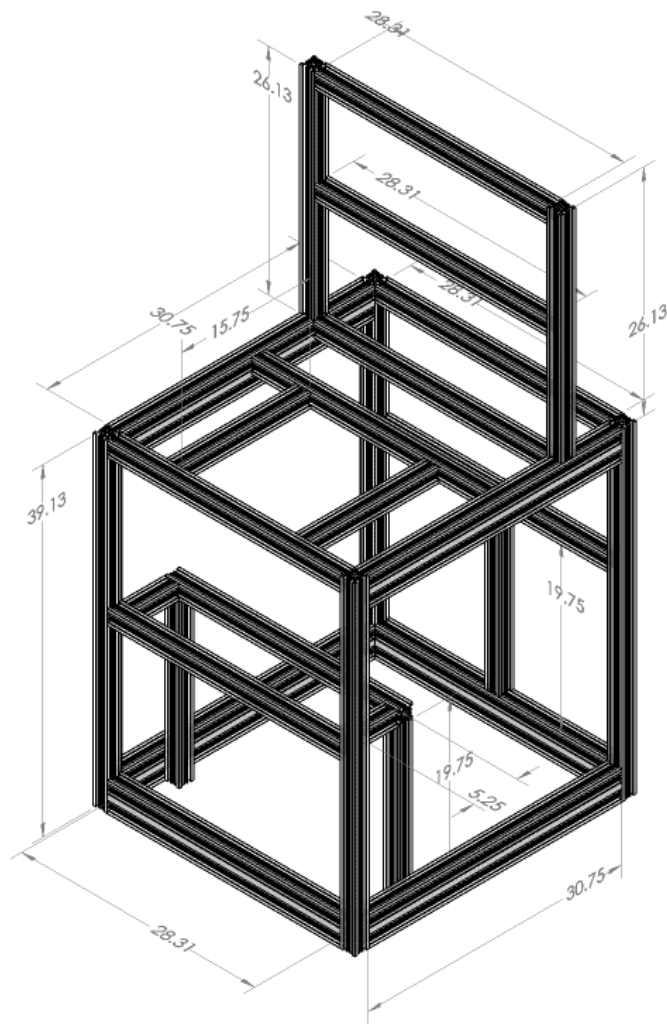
Schematic of the frame to house all of the PECVD equipments [11].
